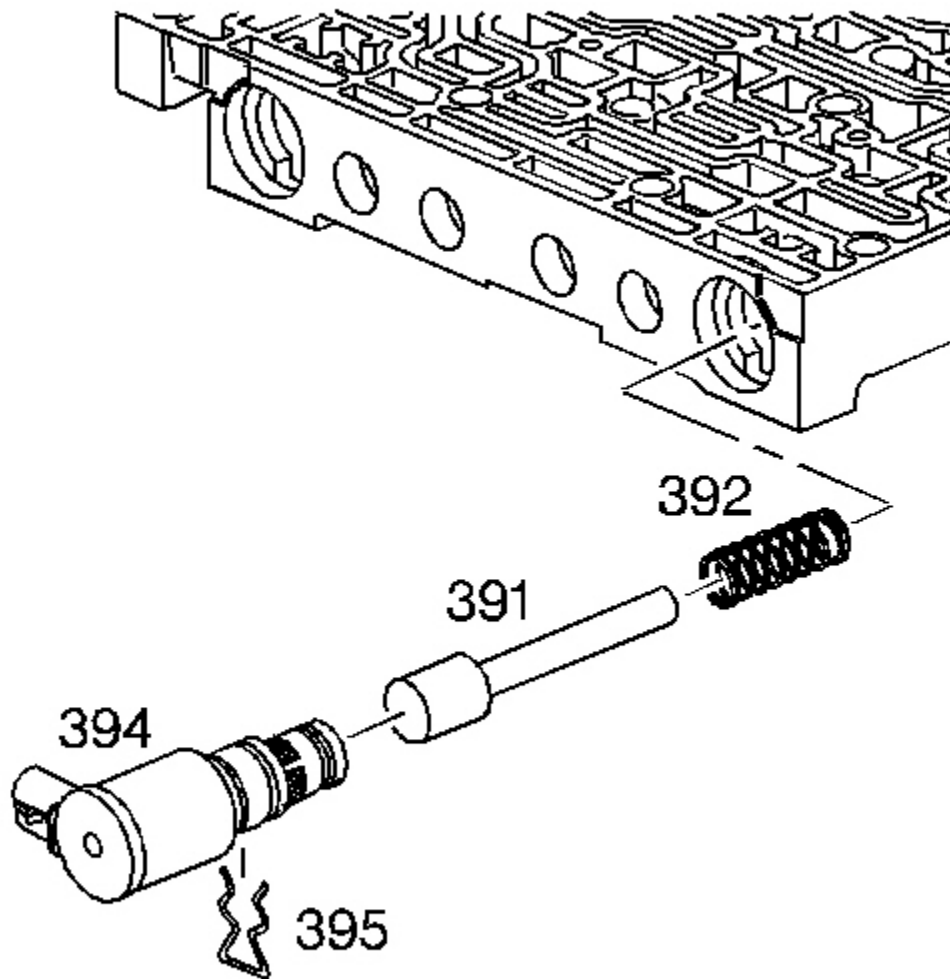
Identifying 3-2 Control Valve & 3-2 Control Solenoid
